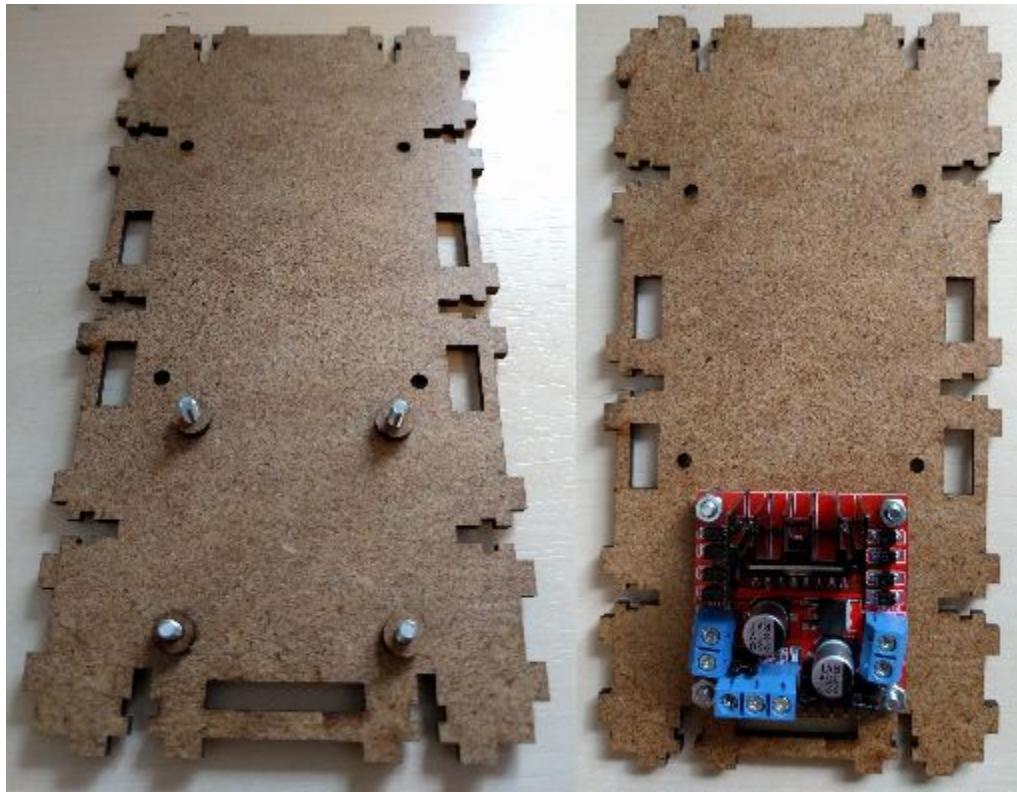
Screwing the motor driver to middle plate (right) with spacers in between (left)
